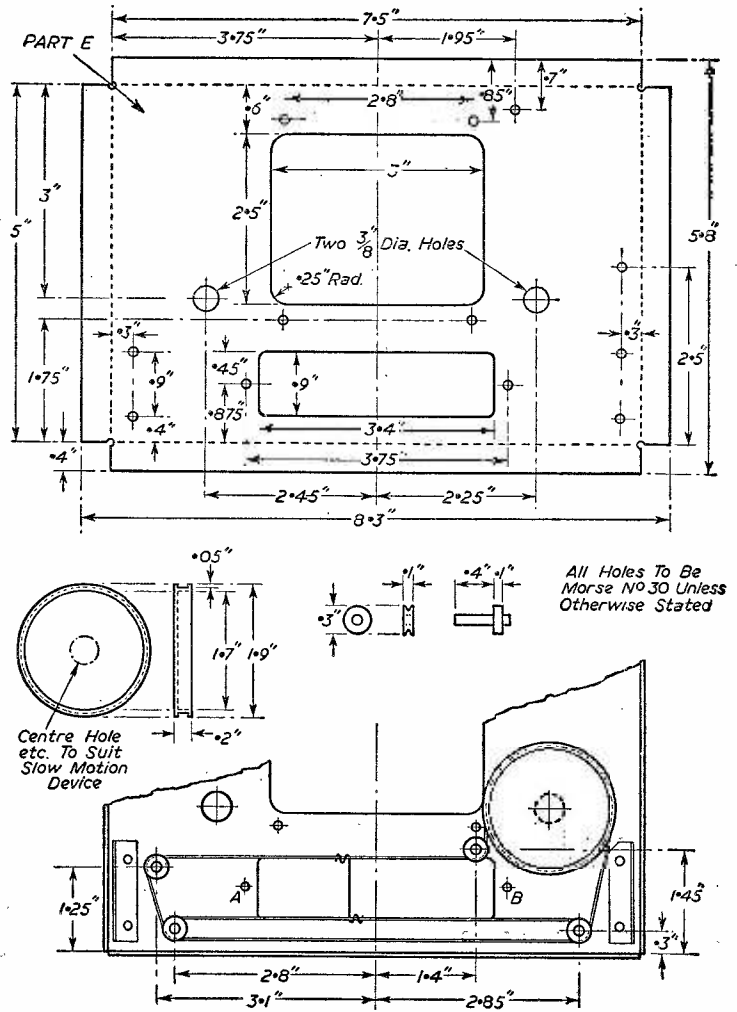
Panel drilling layout and the dial drive mechanism.
